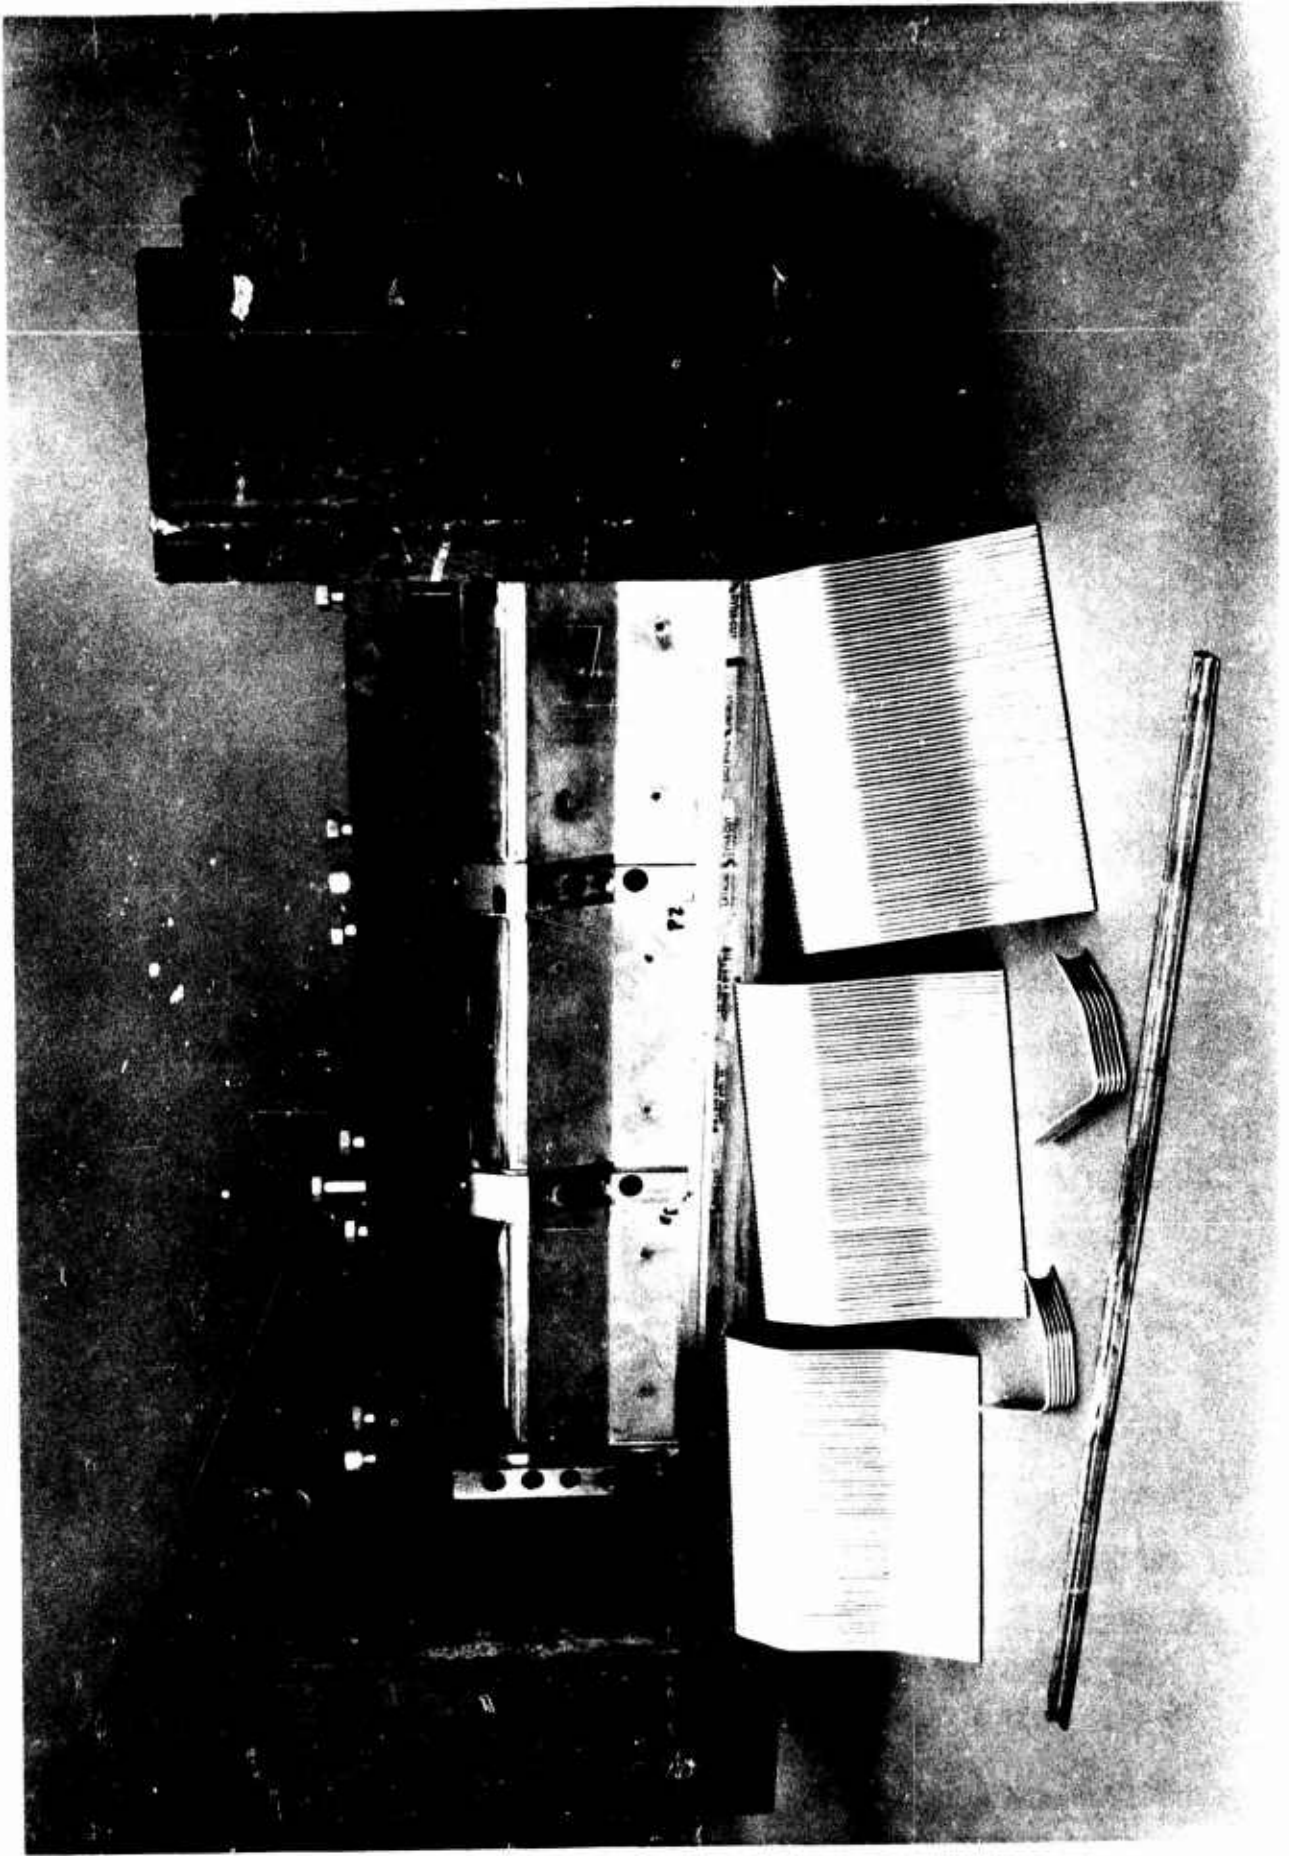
Honeycomb Panel and Baffles Assembled in Weld Fixture.
